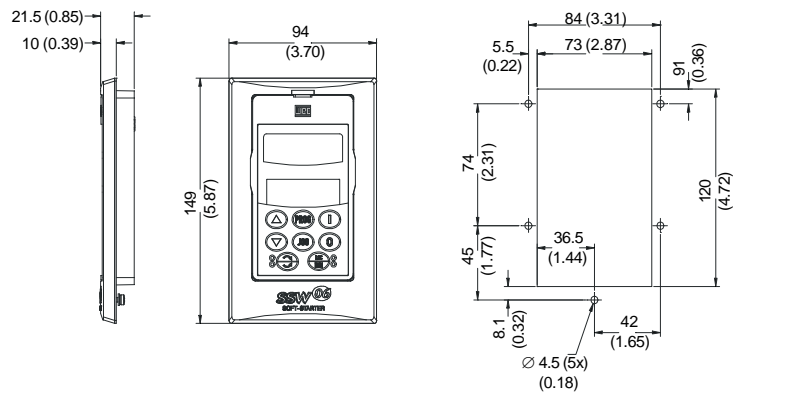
Dimensions in mm (in) and how to install the Keypad directly in the panel
